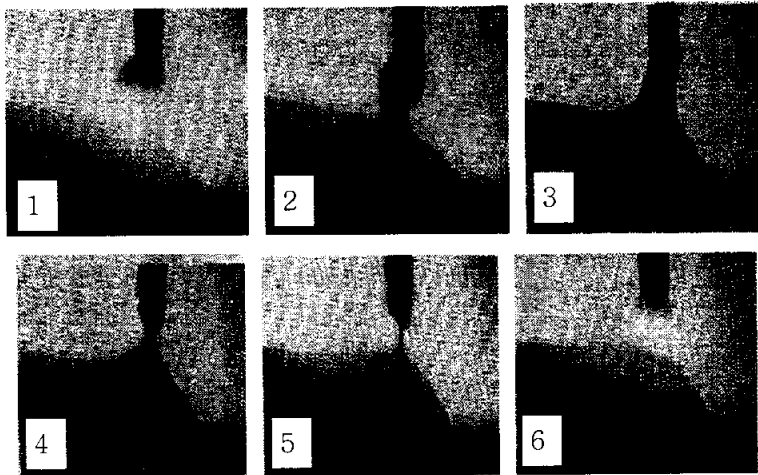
Short circuit transfer mode at CO₂ welding
